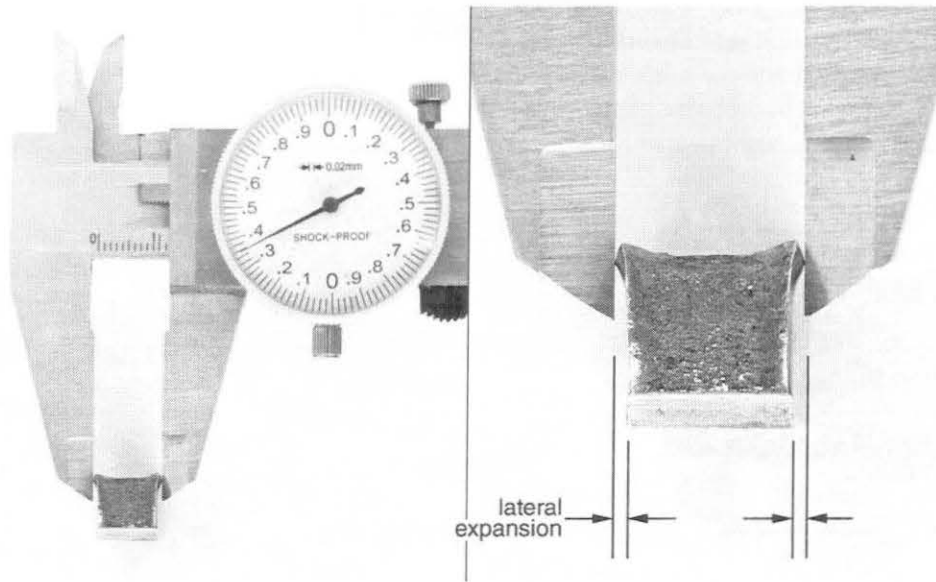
Vernier calipers being used to measure lateral expansion on a 10 mm (full size) Charpy impact specimen.
